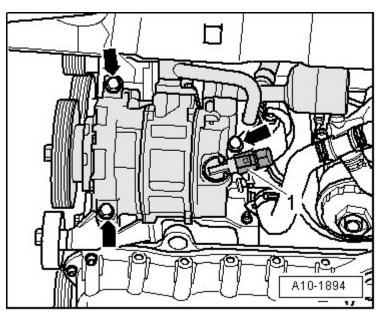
Electrical Harness Connector For A/C Clutch On A/C Compressor Courtesy of AUDI OF AMERICA, LLC
